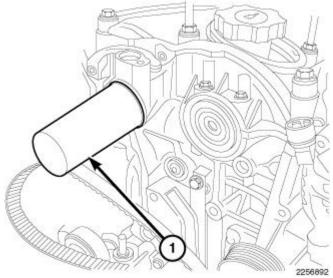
Seal Installer VM 1057 Courtesy of CHRYSLER LLC
